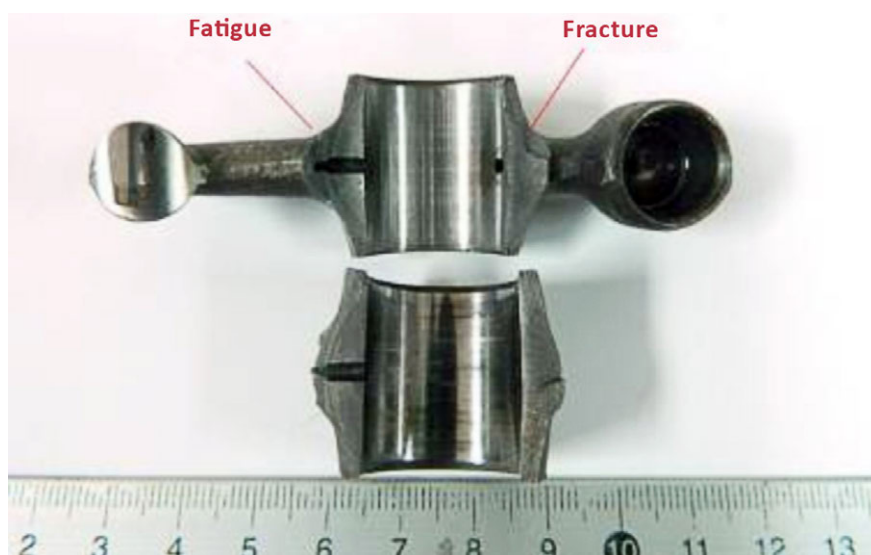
Fatigue and fracture zones on the damaged exhaust rocker arm
